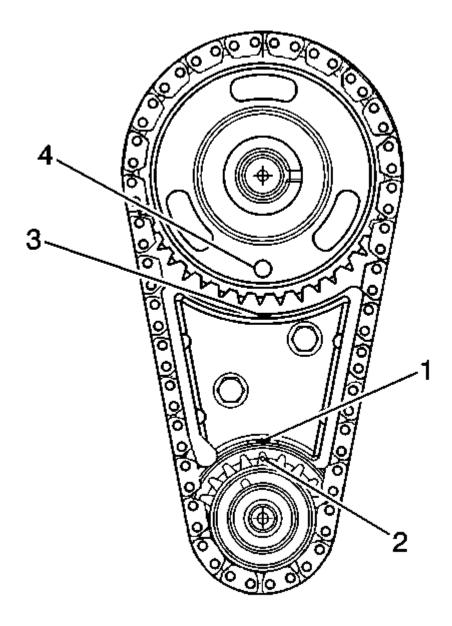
Camshaft Sprocket & Timing Chain Courtesy of GENERAL MOTORS CORP.
